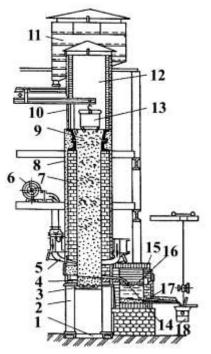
Cupola: 1 – fundament; 2 – column; 3 – folding cover; 4 – bottom; 5 – air tuyere; 6 – ventilator; 7 – refractory lining; 8 – steel shell of shaft; 9 – cast iron plates;
